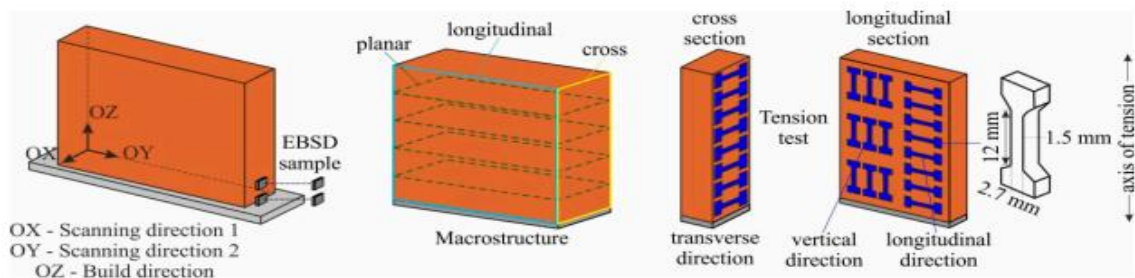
Scheme of cutting samples into metallographic sections and samples for mechanical testing
